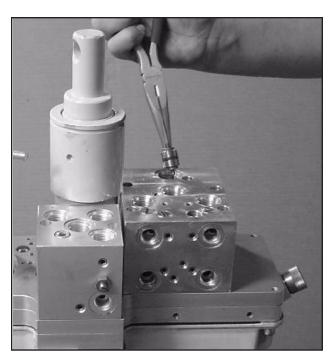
Install P.O. Pilot Spool Assembly with new inner and outer o-rings to the Super V Valve Block Assembly.
